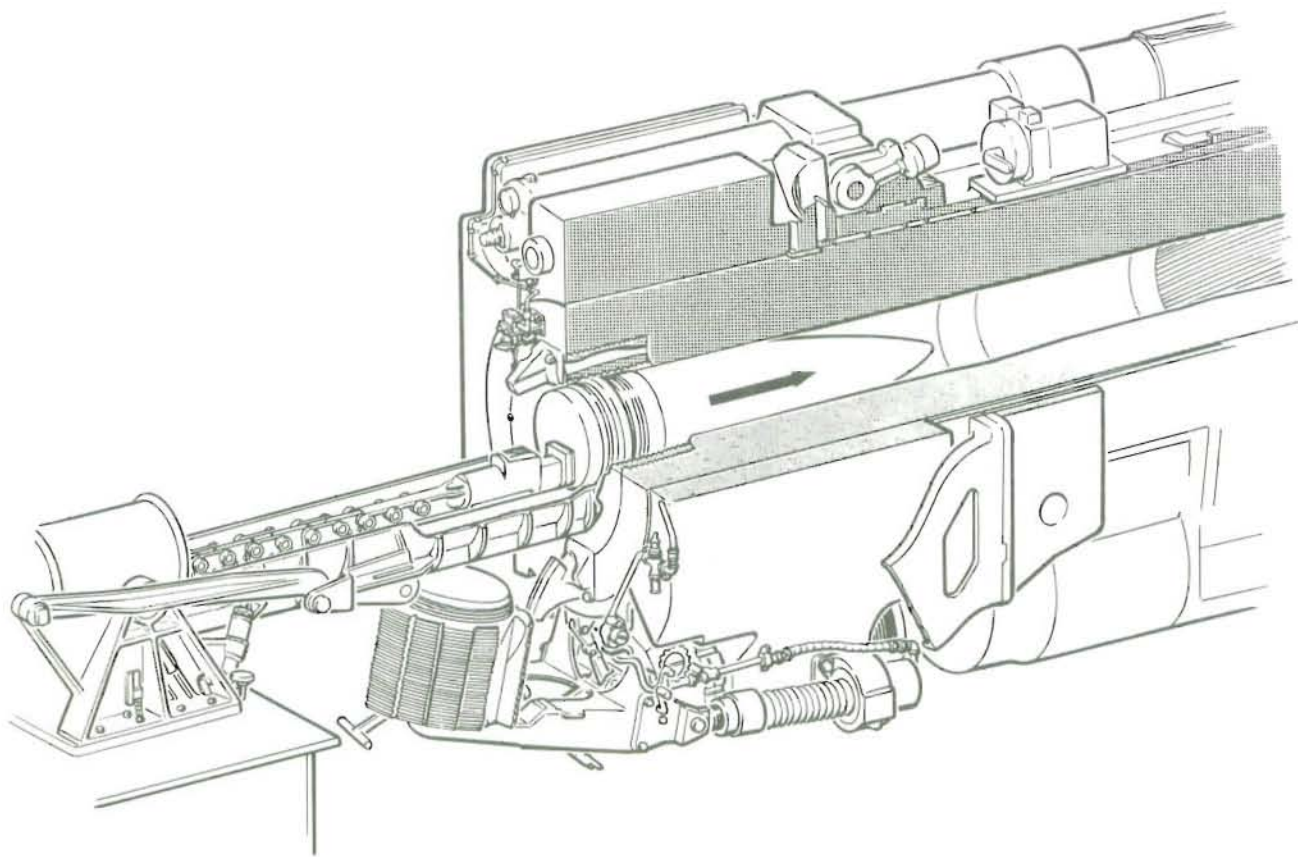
M. 16-inch Gun Assemblies. Projectile Ramming Action.
